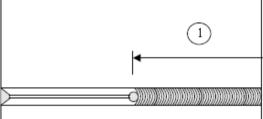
c Welding sequence for cracks with length less than 300 mm
